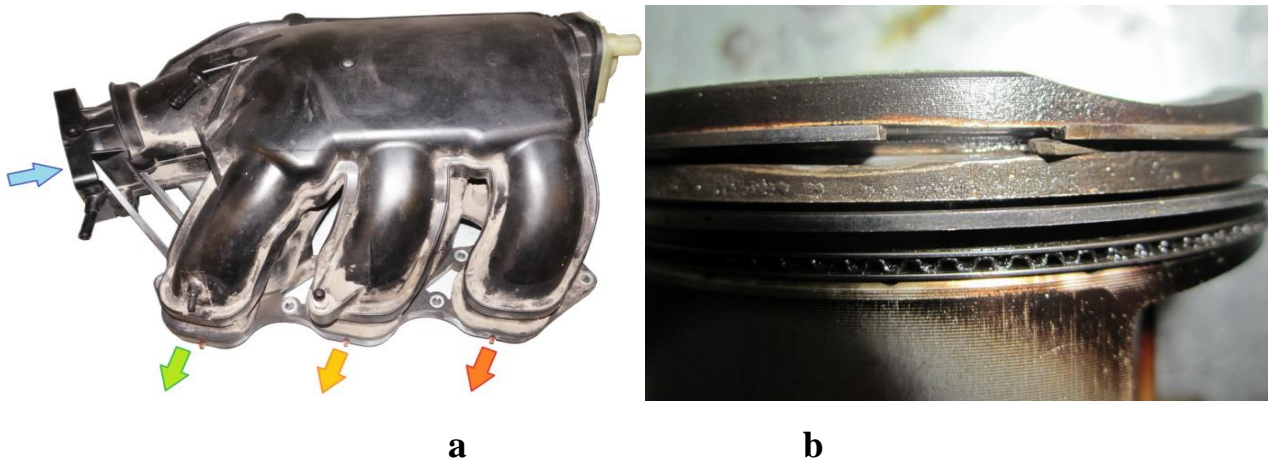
Intake manifold with variable channel length of a V-6 gasoline engine (a) and extremely strong local abrasive wear of piston No. 1 over 80,000 km [1], while there is almost no wear in other cylinders (b).
